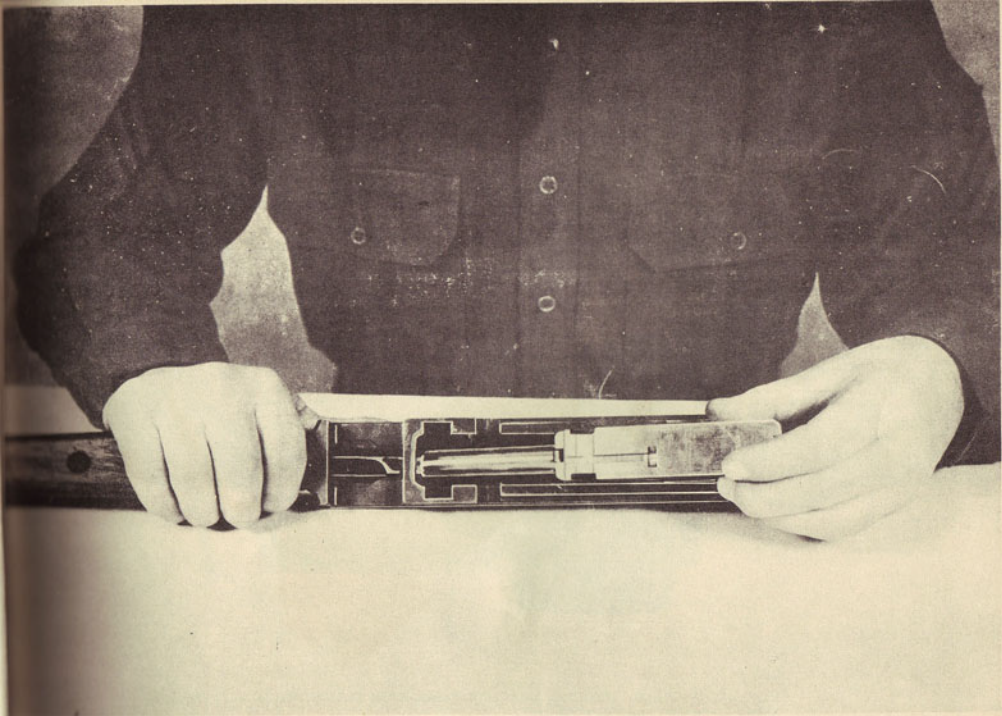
Slide recoiling parts to rear of RECEIVER and lift out BOLT.
